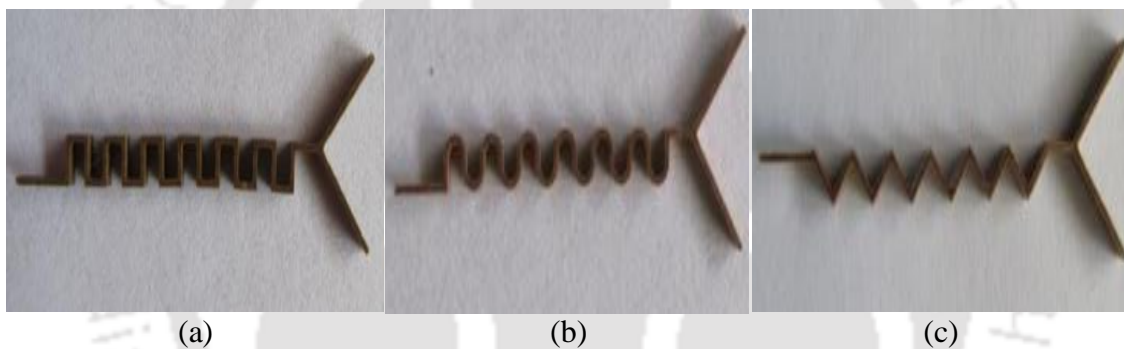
Fabricated copper microtool (a) square, (b) circular, and (c) zigzag [26]
